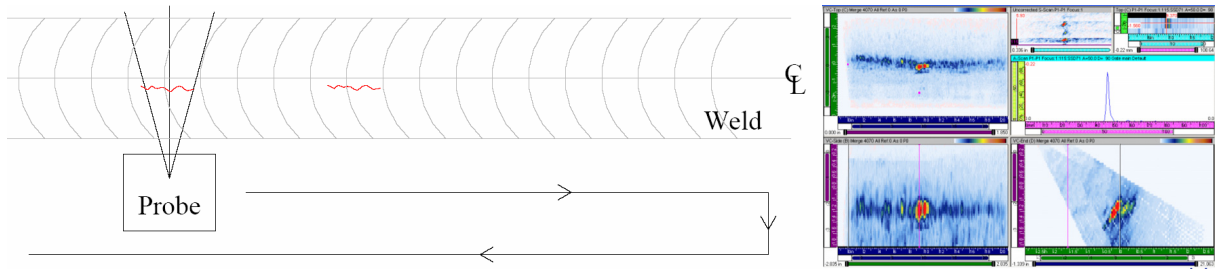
Ultrasonic Phased array inspection of dissimilar metal weld by changing skewing angle to detect circumferential defects (Landrum et al. 2002).
